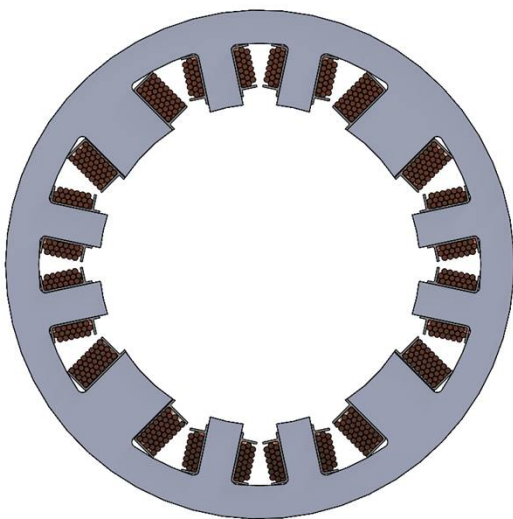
Diagram of 12-pole radial active magnetic bearing illustrating the E-core configuration.
